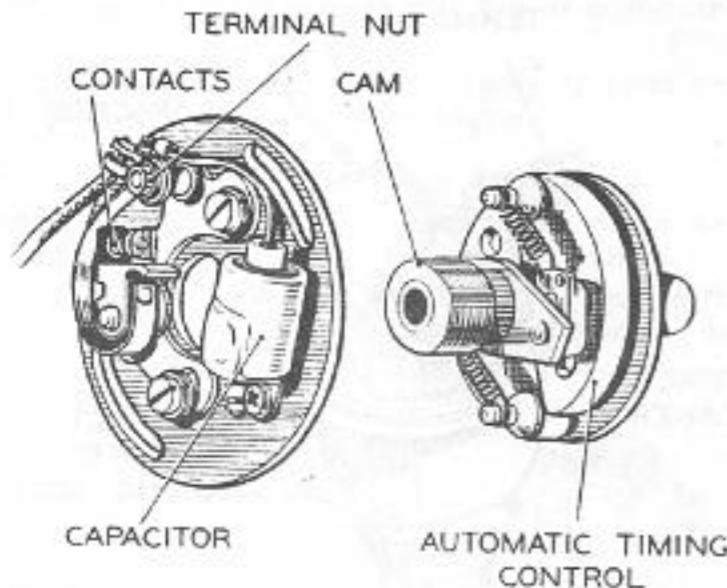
Contact Breaker and Automatic Advance Mechanism Model CAIA, removed from engine.
